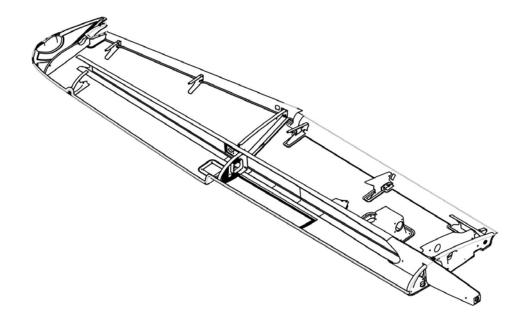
INTERNAL STRUCTURAL LAYOUT OF WING
